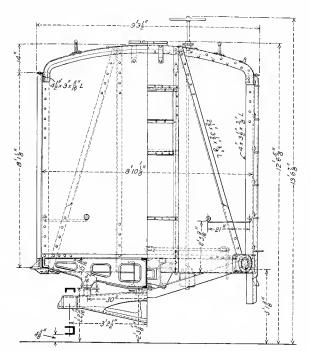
End Elevation and Cross Section of Union Pacific All-Steel Box Car Shown in Figs. 1 and 261.
